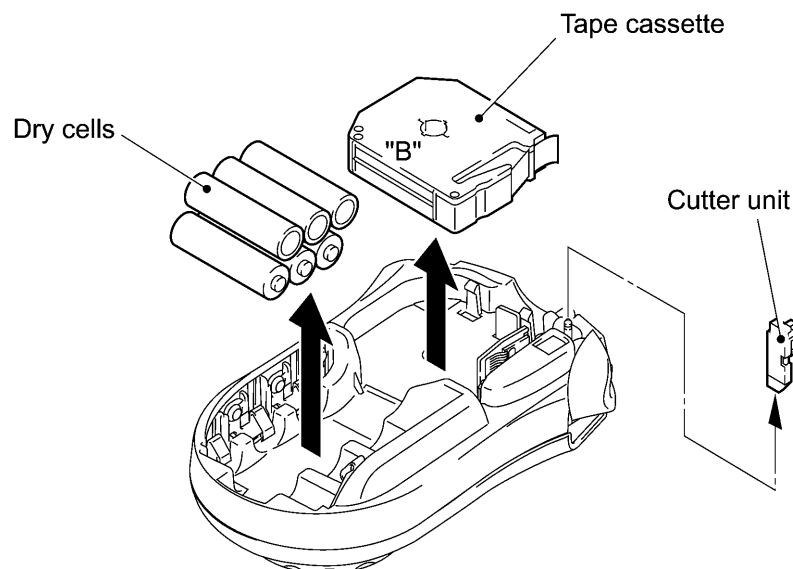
Removing the Dry Cells, Tape Cassette, and Cutter Unit
